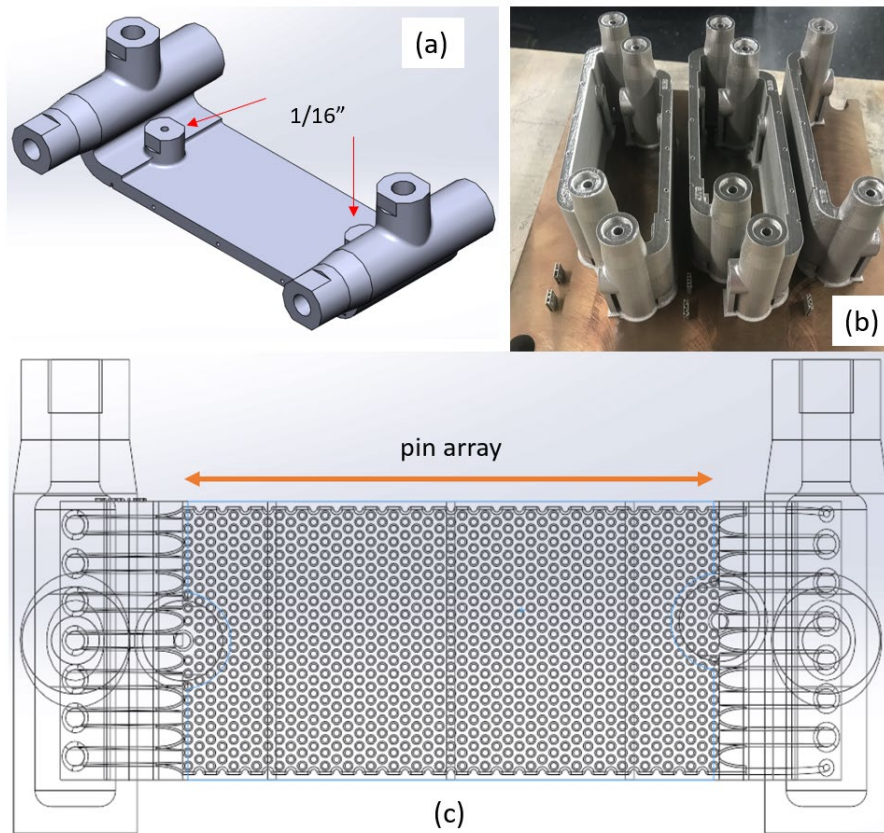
(a) Heat sink CAD isometric view, (b) Printed heat sinks attached to the build plate, (c) See-through view of the heat sink illustrating the internal features.
